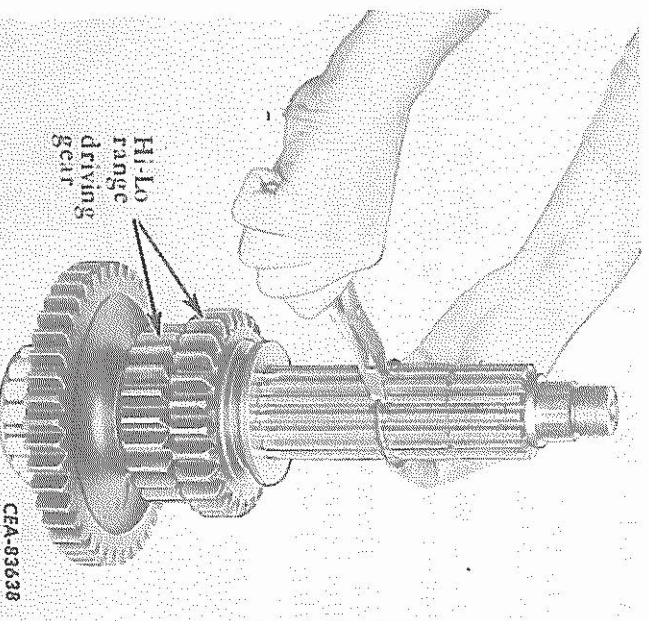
Removing the Second Speed Driven Gear Inner Snap Ring
